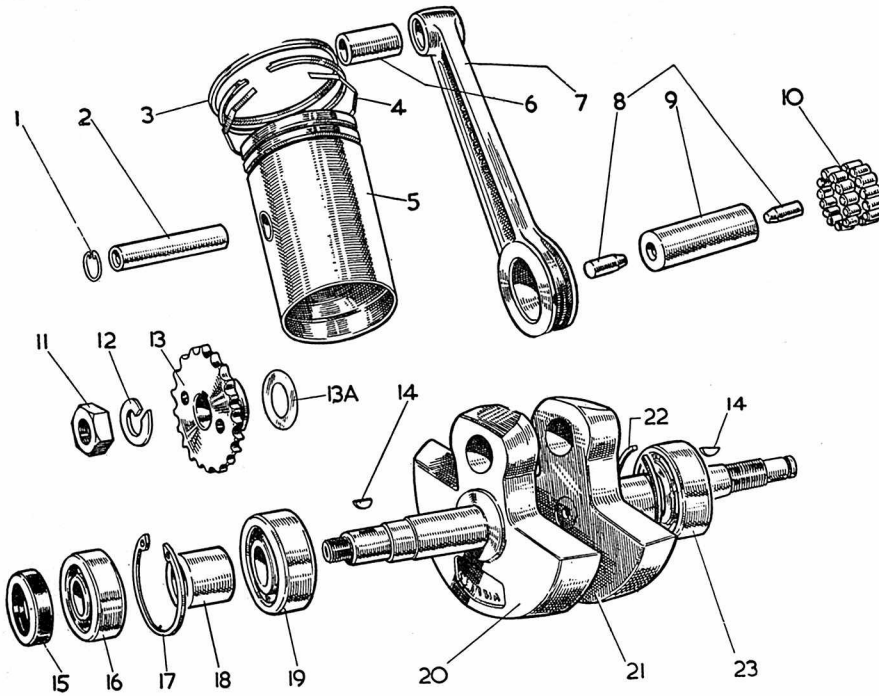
Exploded view of crankshaft, rod and piston assemblies on Mark 2L, 9E, 31C, 31A, 32A, 33A and 34A.
